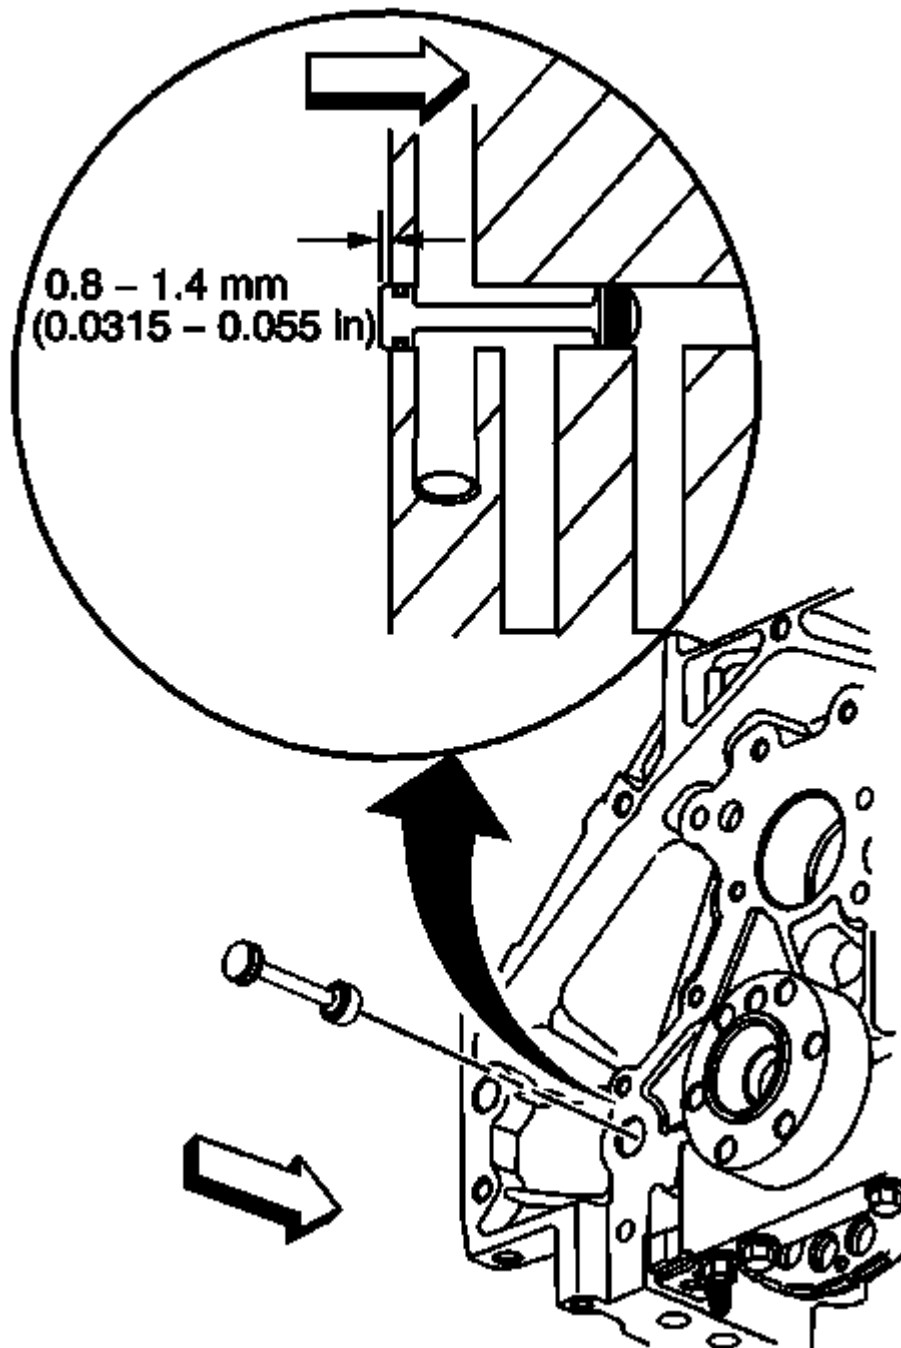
View Of Engine Block Rear Oil Gallery Plug
